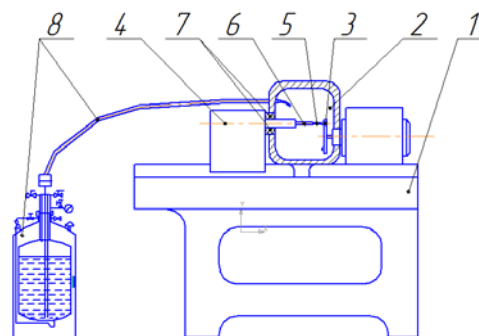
Installation scheme: 1 – frame; 2 - airtight enclosure; 3-abrasive wheel; 4-work feeder; 5-workpiece; 6- work holder; 7- airproof cell; 8- feeder of liquid nitrogen to the work zone.
